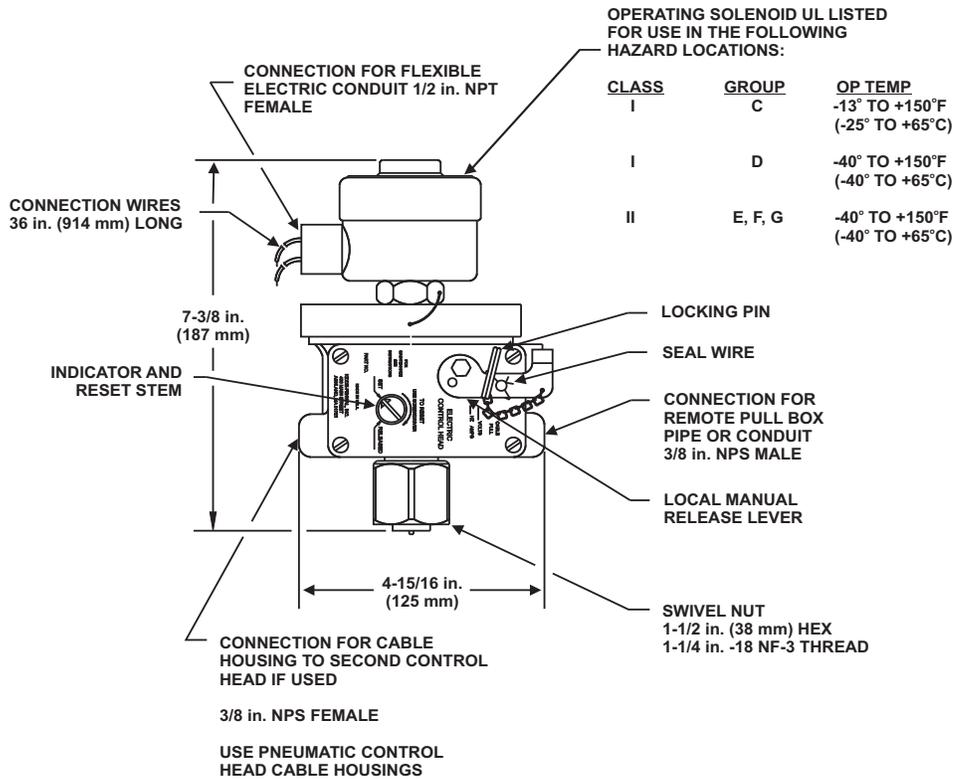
Explosion Proof Electric and Cable Operated Control Head
